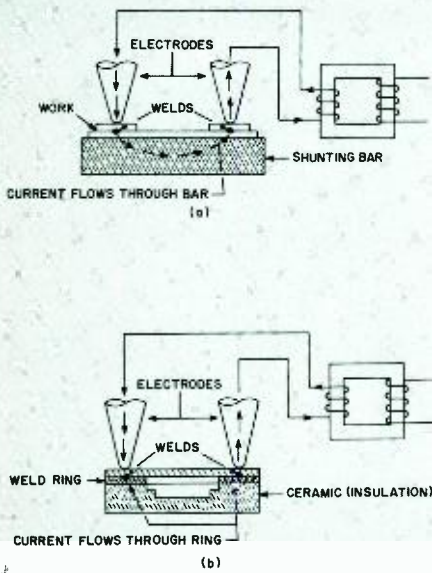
(a) Representation of current flow through metal bar during series welding and (b) welding setup for actual welding of ring to ceramic.
